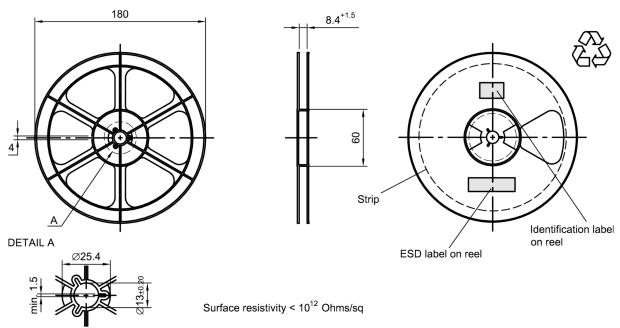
Drawing of reel (first-angle projection) with diameter of 180 mm.
